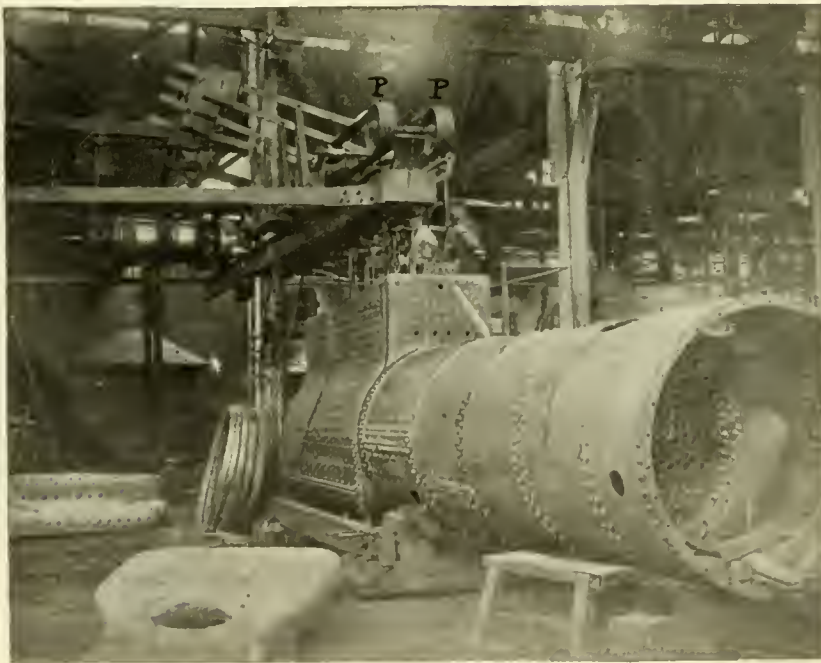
WELLS STAYBOLT-SEATING MACHINE.
